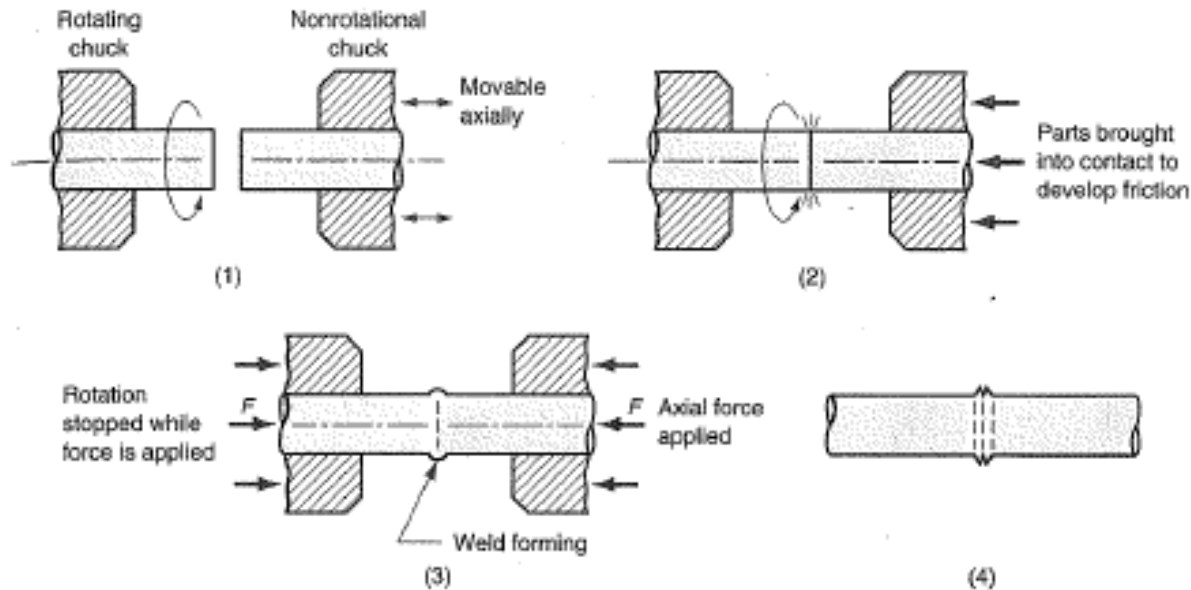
Friction welding (FRW): (1) rotating part, no contact; (2) parts brought into contact to generate friction heat; (3) rotation stopped and axial pressure applied; and (4) weld created.
